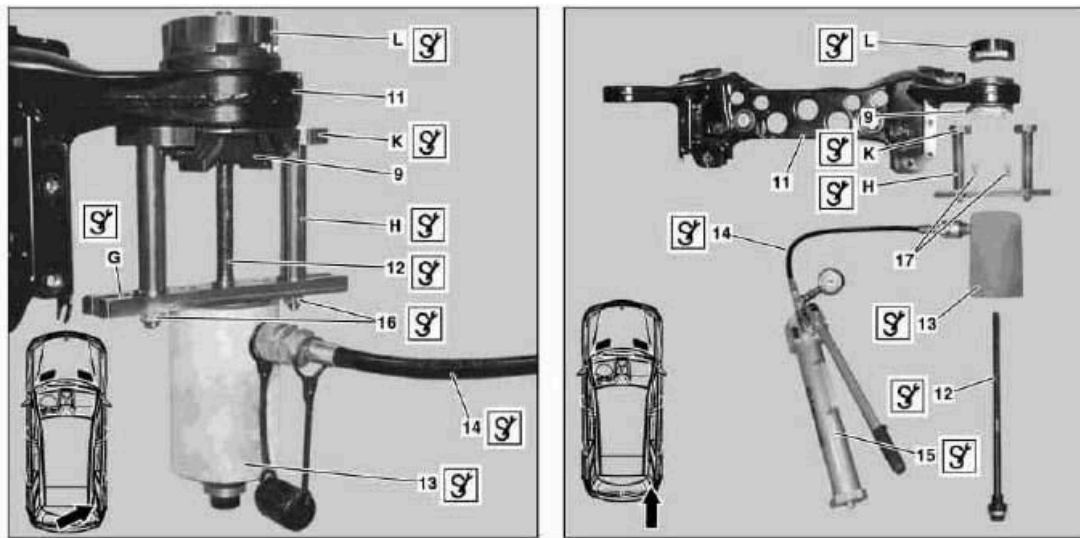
Identifying Threaded Spindle (652 589 00 33 11)
